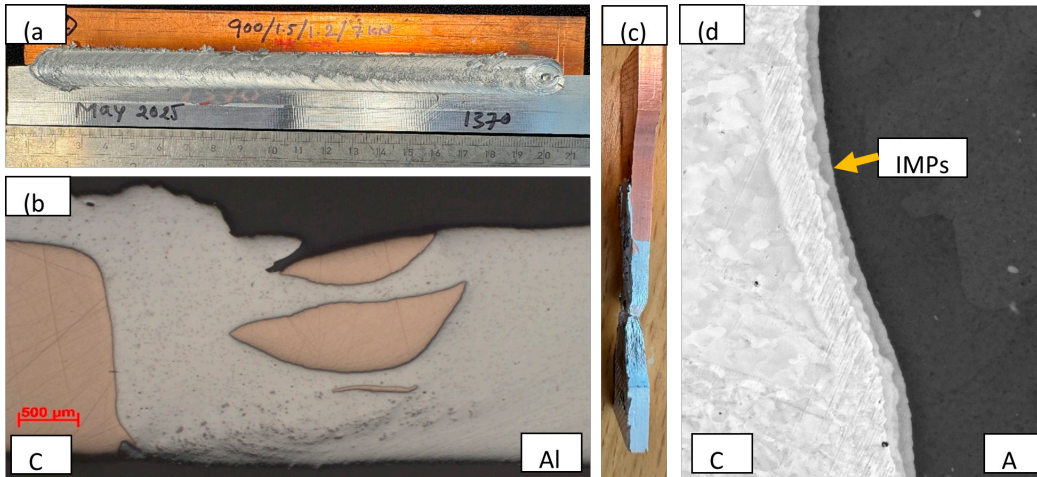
(a) Successfully welded Al (1370 alloy) and pure Cu using the new FSW machine installed at Sintef Industri in Raufoss. (b) Optical image of an Al-Cu weld cross-section. (c) Fractured Al-Cu weld tensile test specimen. (d) High-resolution SEM image showing a thin layer (0.5 μm) of brittle Al-Cu intermetallic phases (IMPs).
